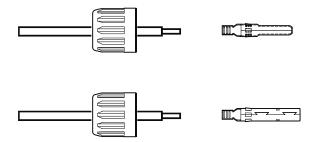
Insert the Wire into the Connector Cap nut and contact pin
